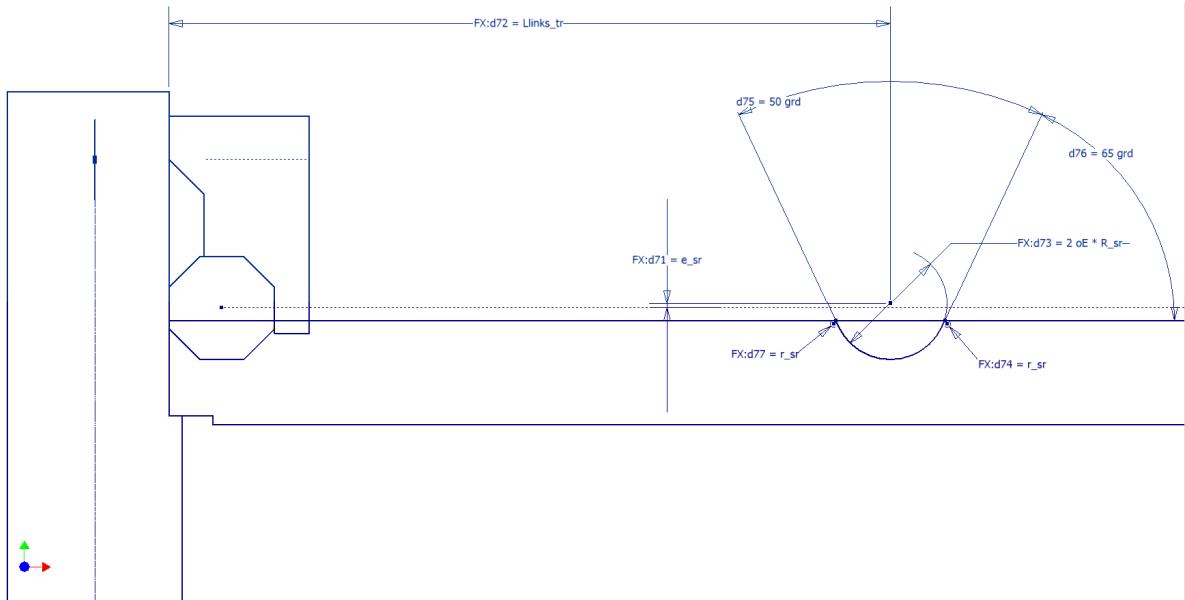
shows the welding seam preparation to connect the shaft with the flanged wheel. The bridge in the middle has a constant value of 2mm for a better centering of the shaft.
